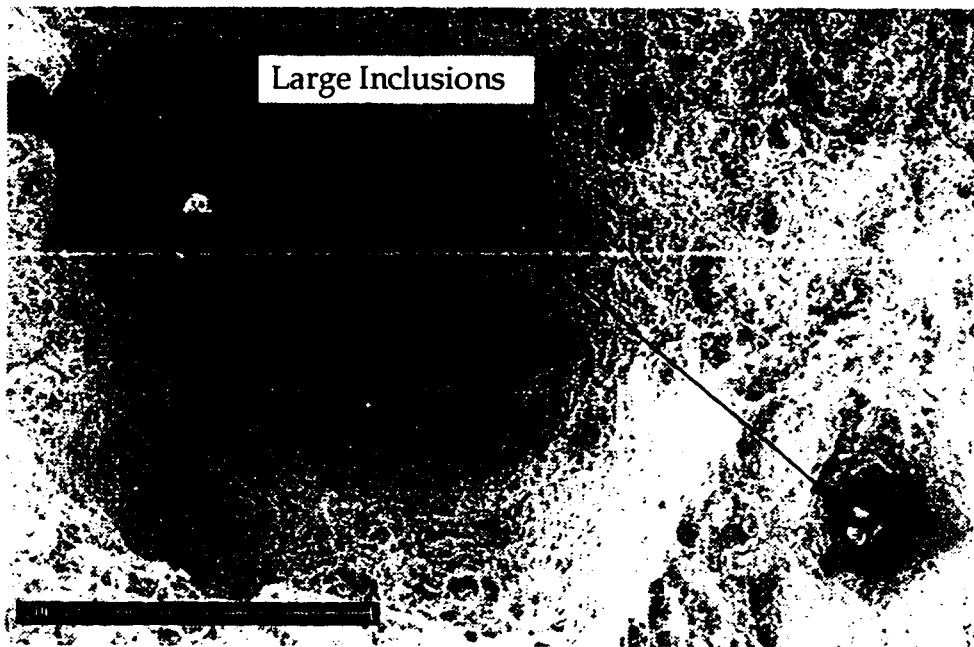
Fracture surface showing large (20 μm) inclusions surrounded by uniform smaller (2 μm) inclusions.
